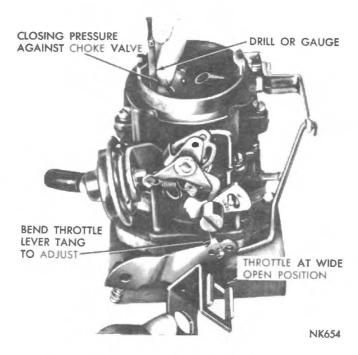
Checking the Choke Unloader Setting (wide open kick) (typical)...
